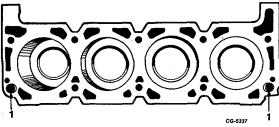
Dowel Sleeves in Block for Cylinder Head
